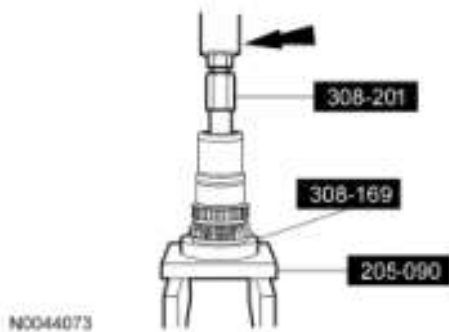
Removing Needle Bearing And Sleeve Bearing Using Input Shaft Bearing Remover
